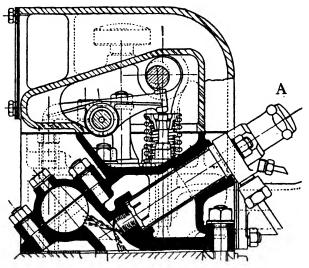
THE PERKINS COMBUSTION CHAMBER
